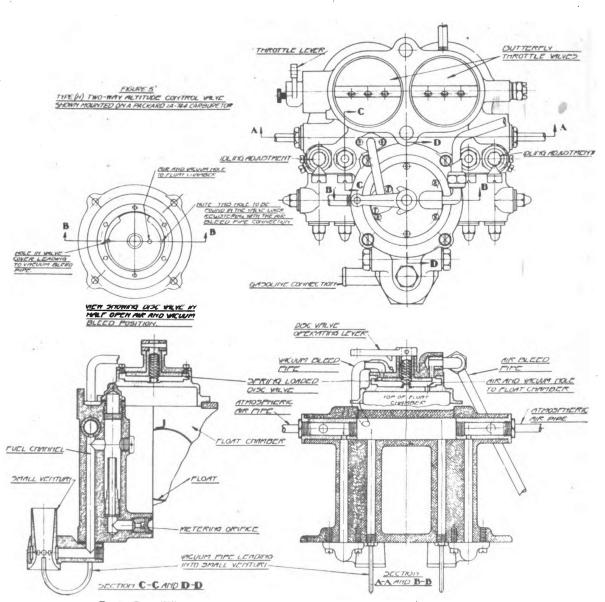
Type "H" two-way altitude control valve shown mounted on Packard 1A-744 carburetor
